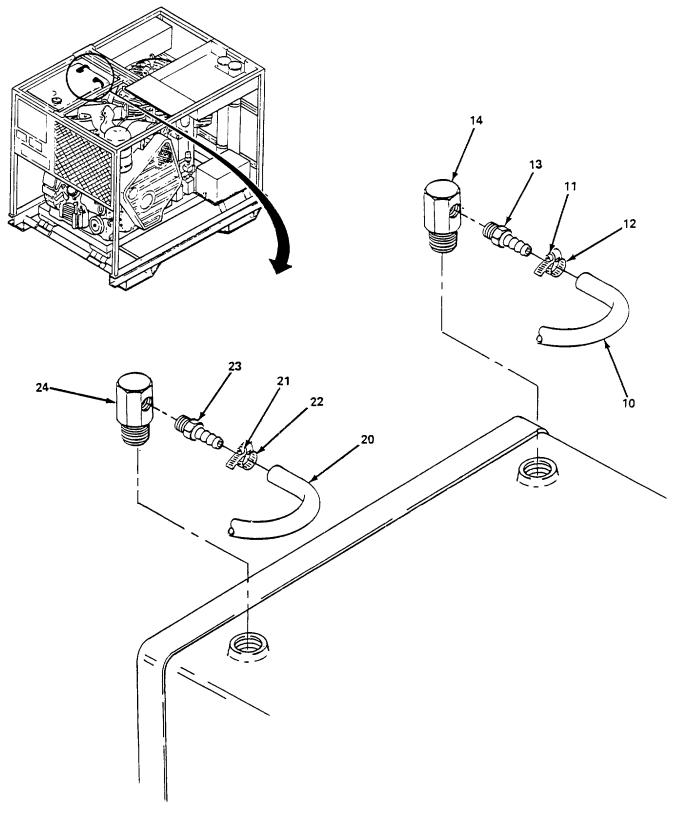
Fuel Lines and Fittings, Replace (Sheet 2 of 2).
